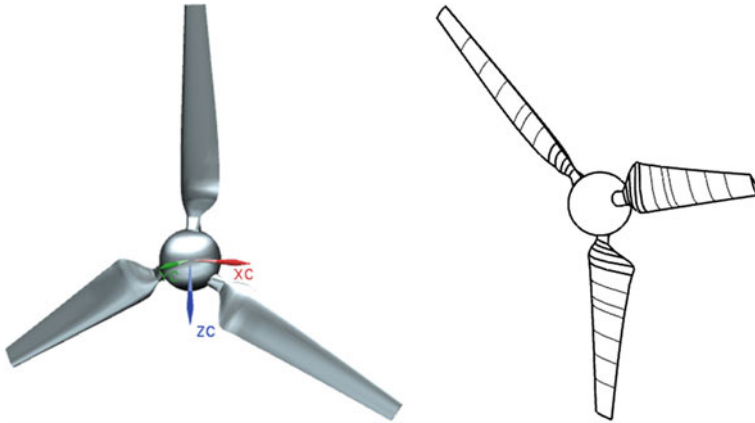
CAD turbine model of horizontal rotation axis and its view with segment division
